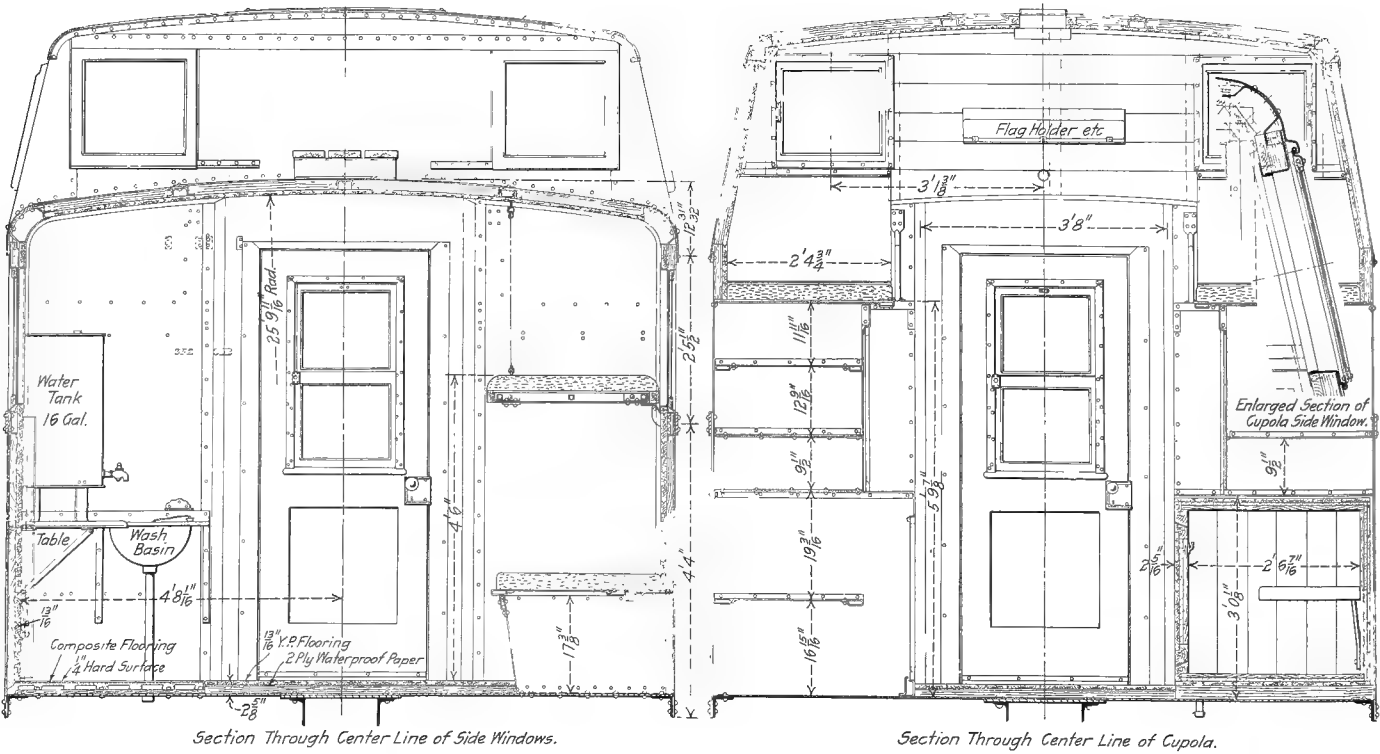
Cross Sections of Pennsylvania Railroad Steel Caboose Shown in Figs. 118, 120, 367, 369 and 370.
